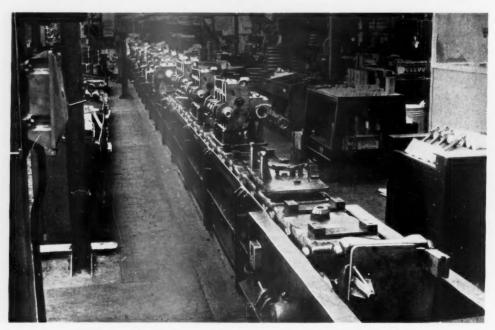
Part of the common engine assembly conveyor for diesel, petrol and vaporizing oil engines
